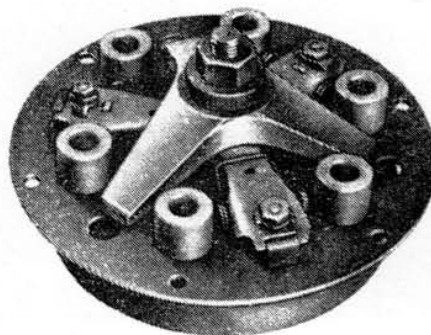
/1 - MP 2-101 Assembly Plate with Clutch
